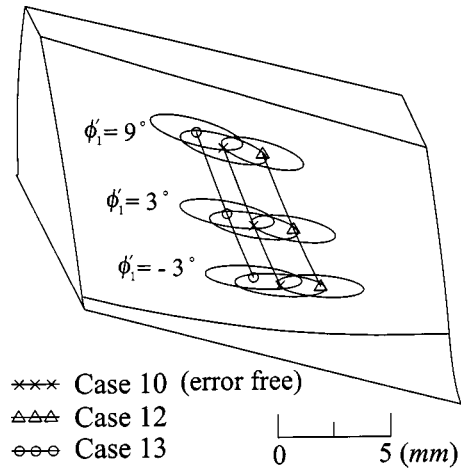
Bearing contacts of helical concave beveloid pairs ground by novel grinding method with assembly errors
